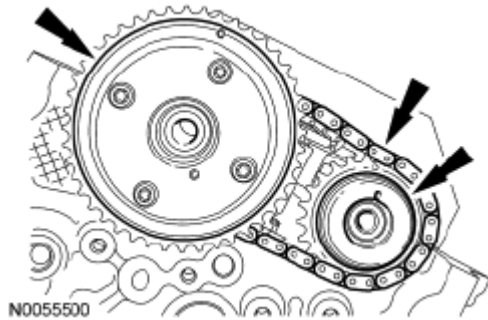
Positioning LH Secondary Timing Assembly Onto Camshafts
